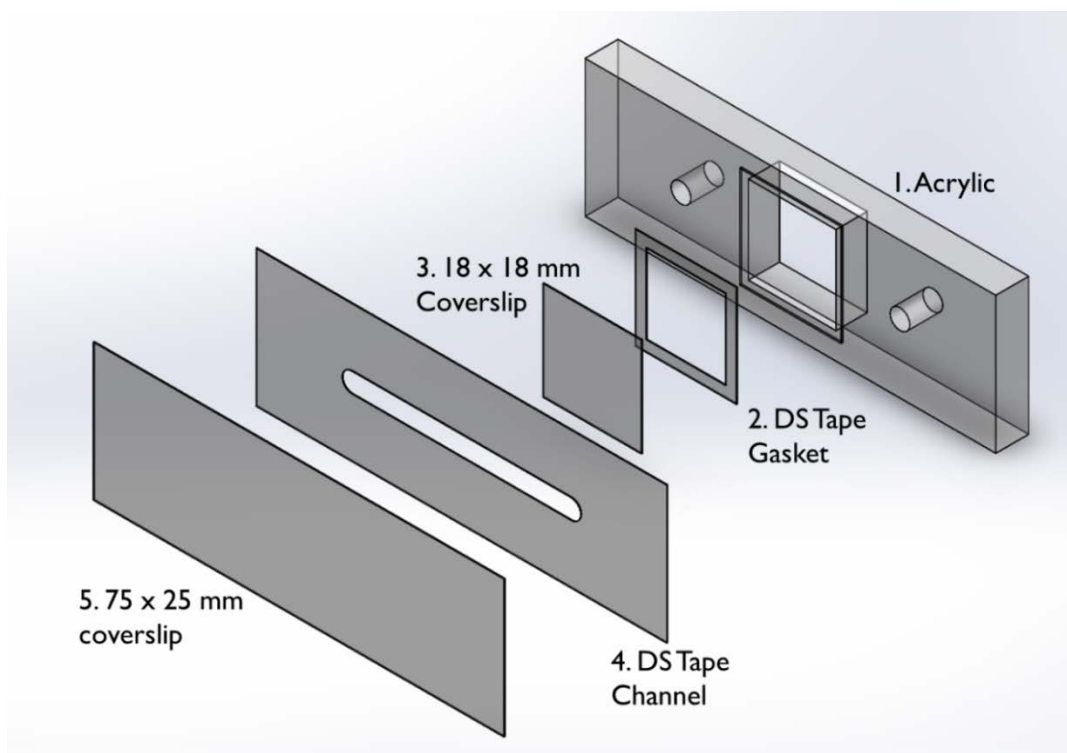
Glass-on-glass flow cell: exploded view with parts labelled. The acrylic, double-sided tape gasket and double-sided tape channel were laser cut. DS Tape – Double-sided tape. Firstly, the window, inlet and outlet holes were laser cut from 6 mm acrylic cut to 75 mm by 25 mm. A lip was engraved around the window to a depth of 0.31 mm to counter-sink the glass window (Speed 400, 25% power, 1-2 repeats or until depth was achieved). Next, a small piece of double-sided tape was placed over the window and the lip, and laser cut to form a gasket that fit in the lip. An 18 x 18 mm glass coverslip was adhered to the double sided tape to form the small glass window. Double-sided tape was taped down to a piece of acrylic (without removing the paper backing) and the channels were laser cut before adhering the double-sided tape to the flow cell. A 75 x 25 mm glass coverslip was fitted onto the double-sided tape to complete the flow cell.
